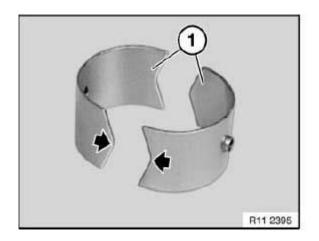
Identifying Bearing Shells Courtesy of BMW OF NORTH AMERICA, INC.
